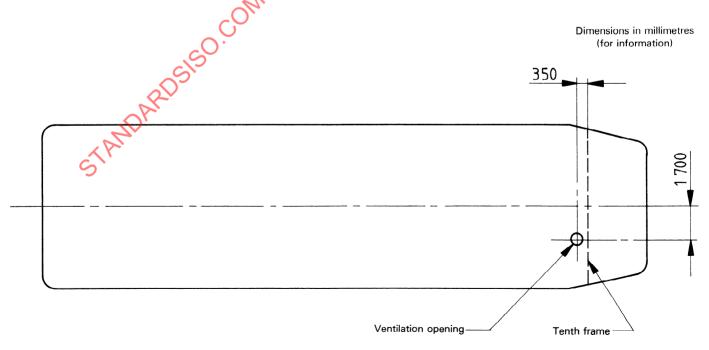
Arrangement of the ventilation opening of shipborne barges, series 3
